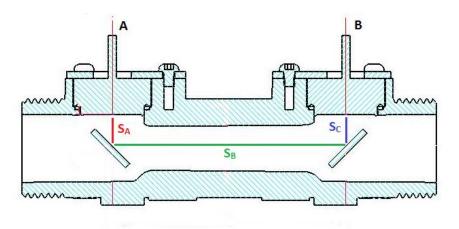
ULTRASONIC TRANSDUCER ASSEMBLY
